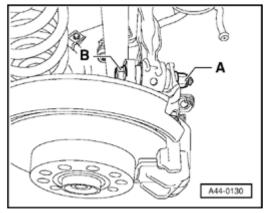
Identifying Nut And Eccentric Bolt Courtesy of VOLKSWAGEN UNITED STATES, INC.
